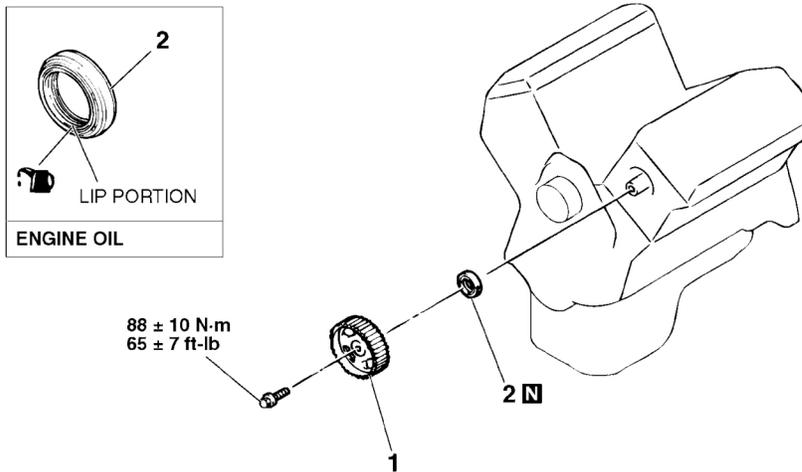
Camshaft Sprocket & Holding Tool
